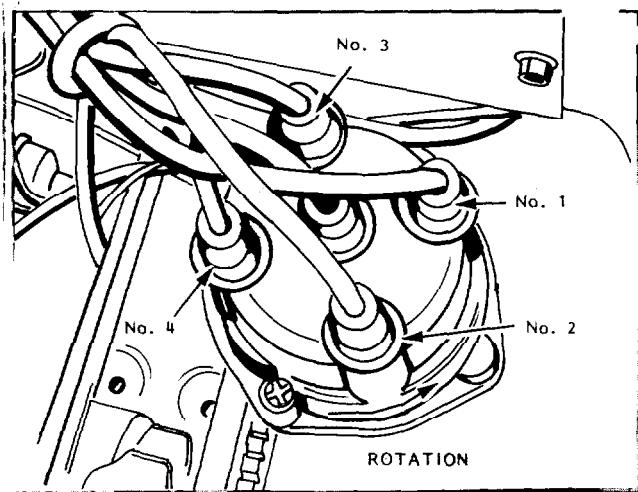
DELCO-REMY DISTRIBUTOR MOUNTING 313024C
